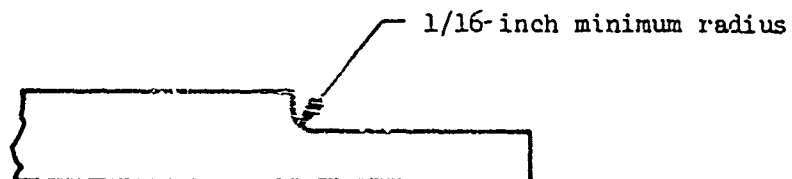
Minimum Fillet Radius for Machined Undercuts.
